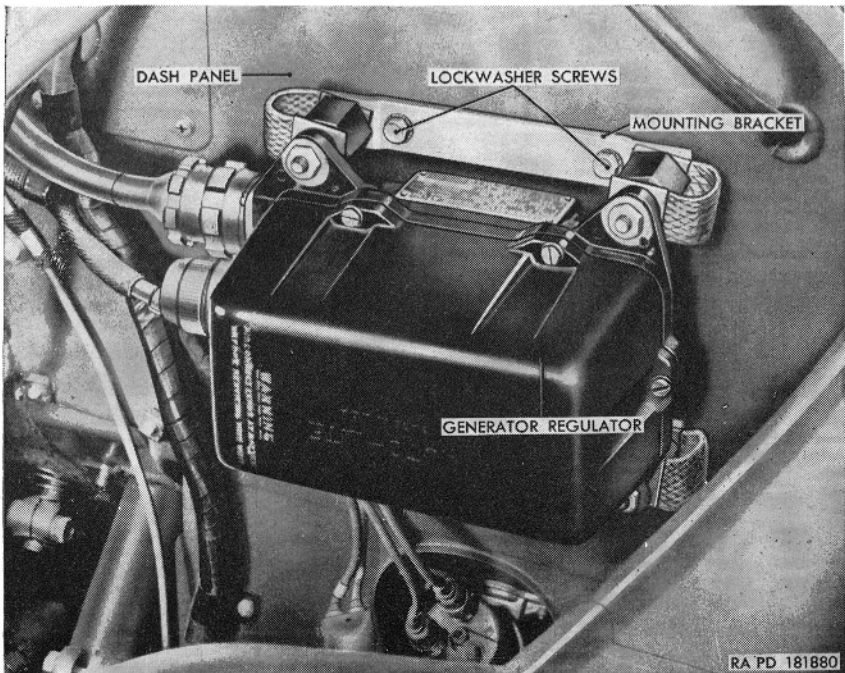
(Added) Generator regulator assembly M170—installed.
